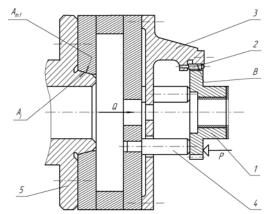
A machining fixture for hole and face gear workpiece grinding.
